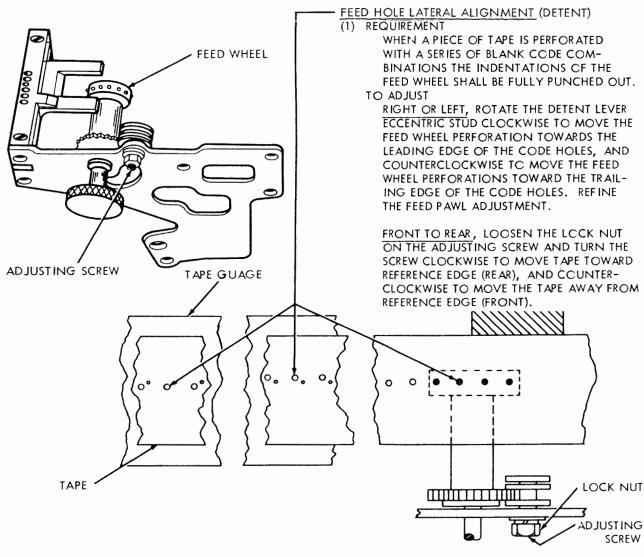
B. TYPING REPERFORATOR TT-373/UG, TT-375/UG, PERFORATOR MECHANISM FOR FULLY PERFORATED TAPE
